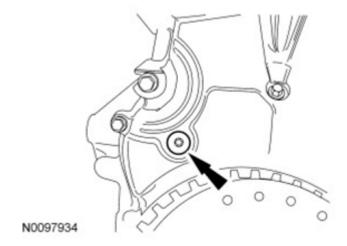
Locating Upper Front Cover Timing Hole Plug Courtesy of FORD MOTOR CO.
